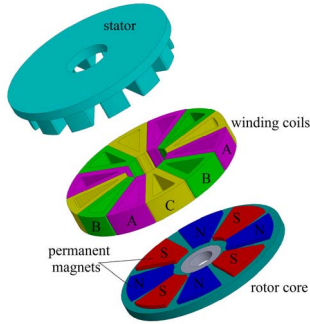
3-D view of a four-pole-pair/12-slot SSSR AFPM machine.
